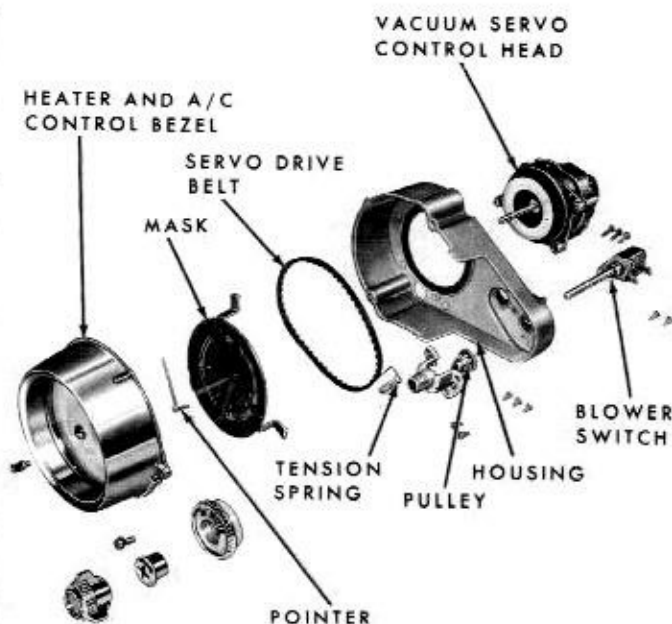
Heater—Air Conditioning Controls—1960—(60L-8815)
